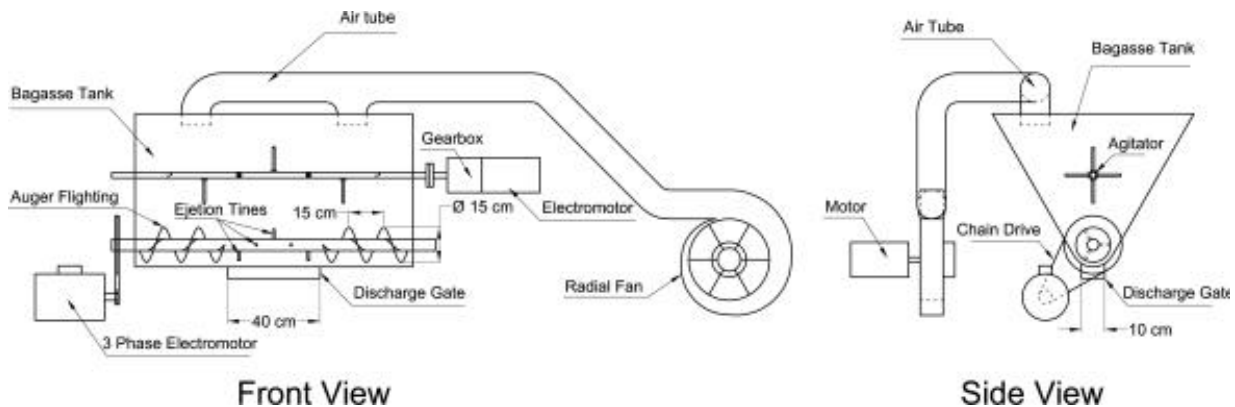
Schematic drawing of the prototype machine (chassis not shown)
